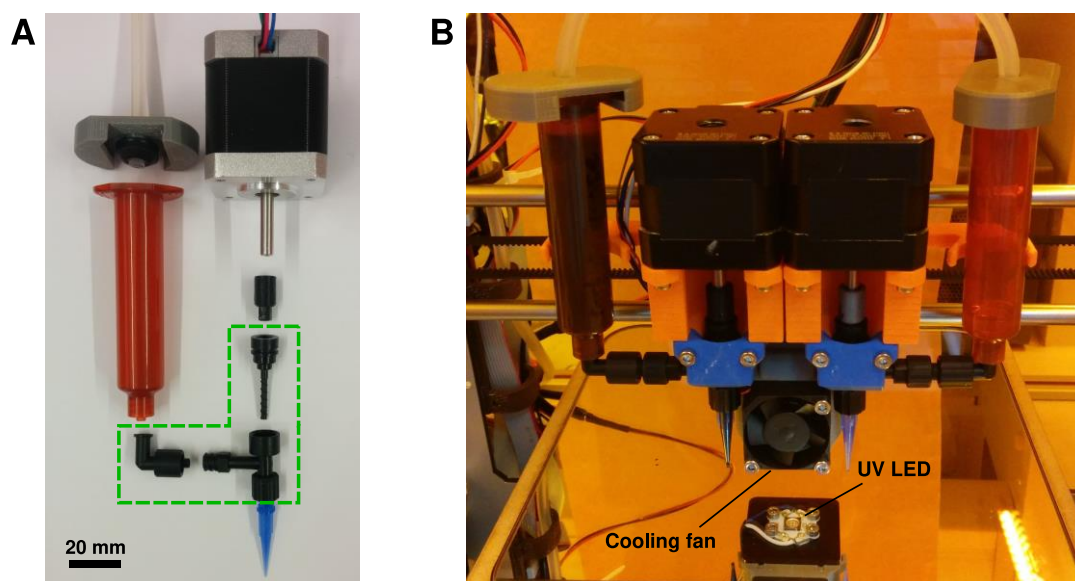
Auger extruder print head. A) Exploded view of the auger extruder. The parts of the disposable auger valve are highlighted by the green frame. B) Print head with dual auger extruders and a UV LED for curing. The LED can be seen in the reflection on the mirror surface of the print bed.
